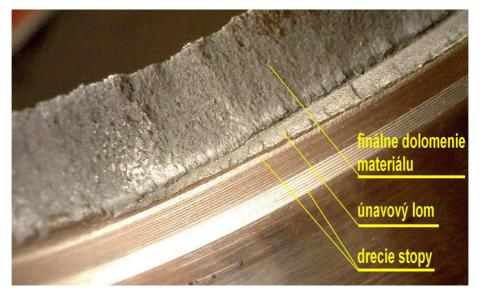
Smaller opposite part of fatigue fracture and steep-incline area of final material rupture.
